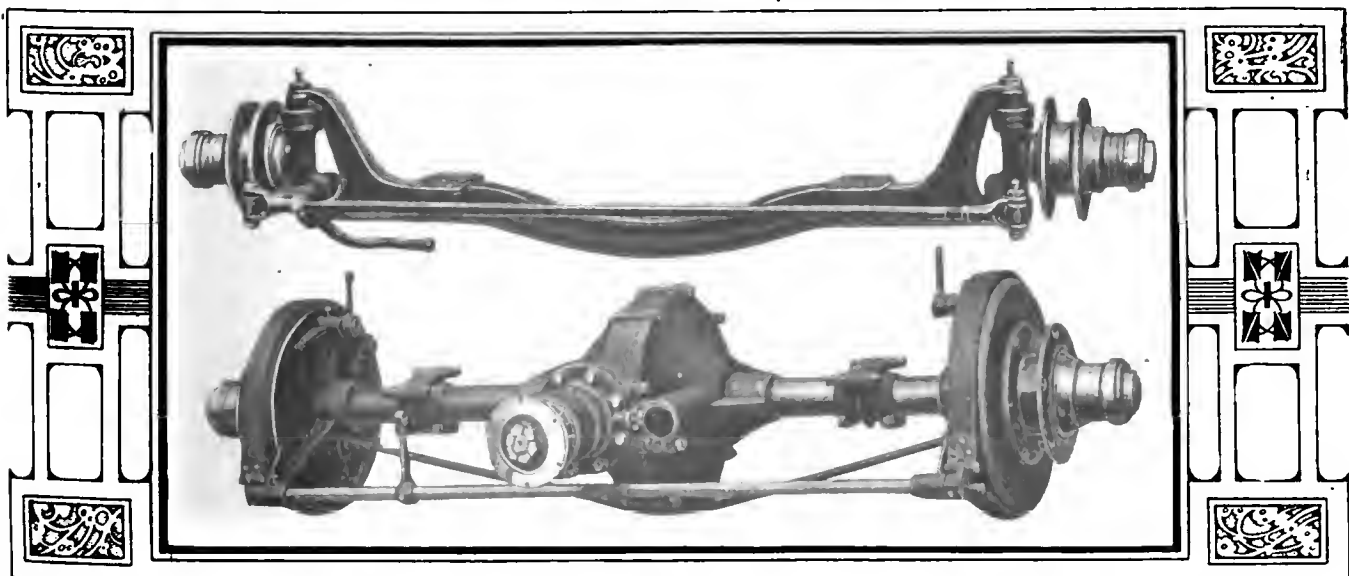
Front and rear axles, both of standard design; the former an I-section forging, the latter of the floating type.
